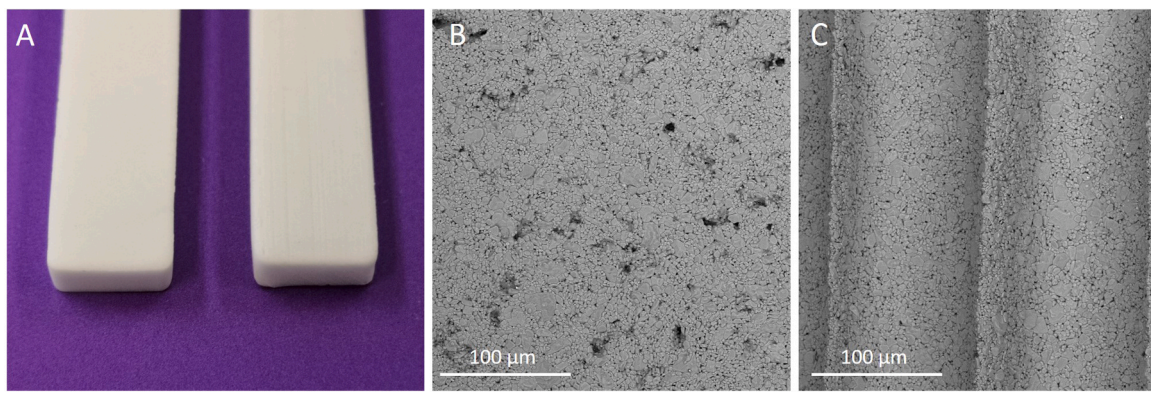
Photograph of injection molded and sintered parts. Left: steel mold. Right: 3D printed PVA mold (A). SEM image of the surface of the rod fabricated with the steel mold (B). SEM image of the surface of the sample produces with a PVA mold showing the typical line structure arising from a FDM 3D printer (C).
